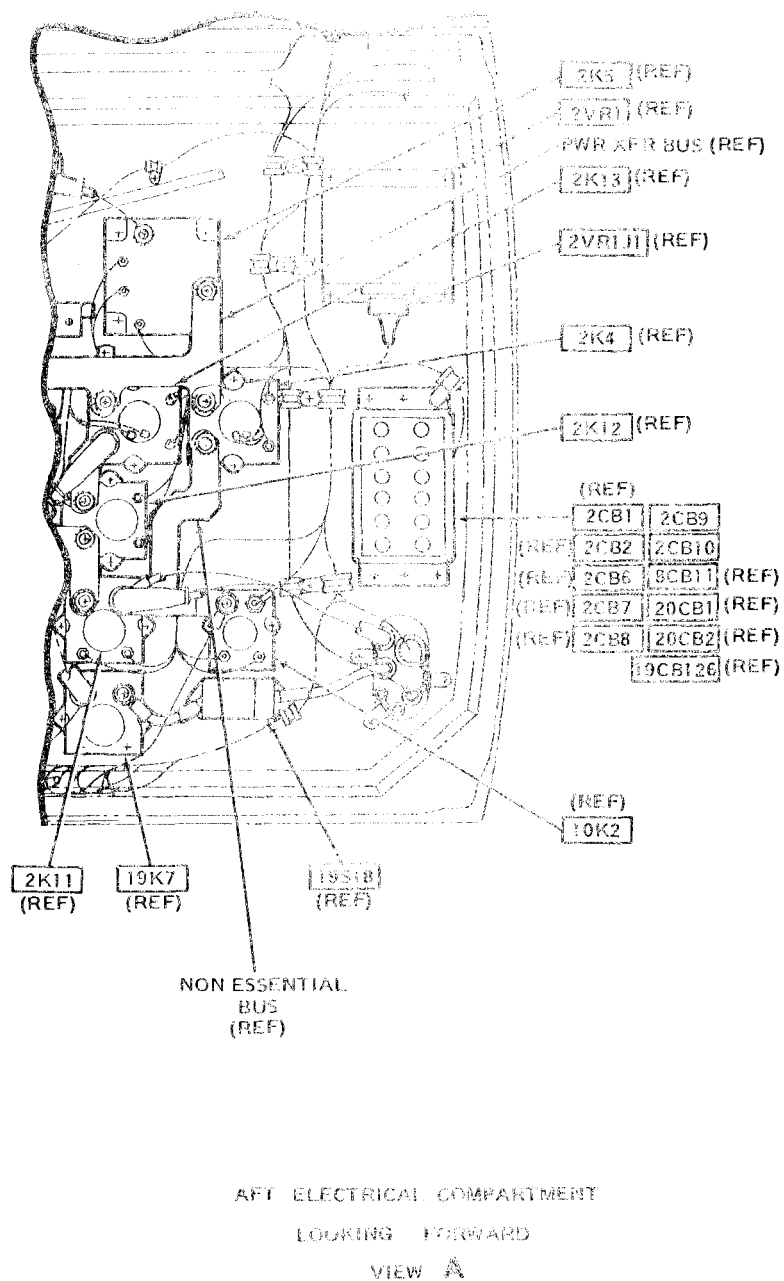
Fire Control System (Equipment Location) (Sheet 2 of 14)
